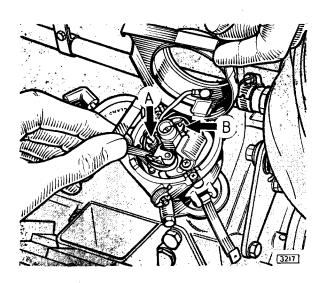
Checking the gap—the screw "A" secures the fixed contact plate; the contact plate is adjusted by turning a screwdriver in slot "B".
